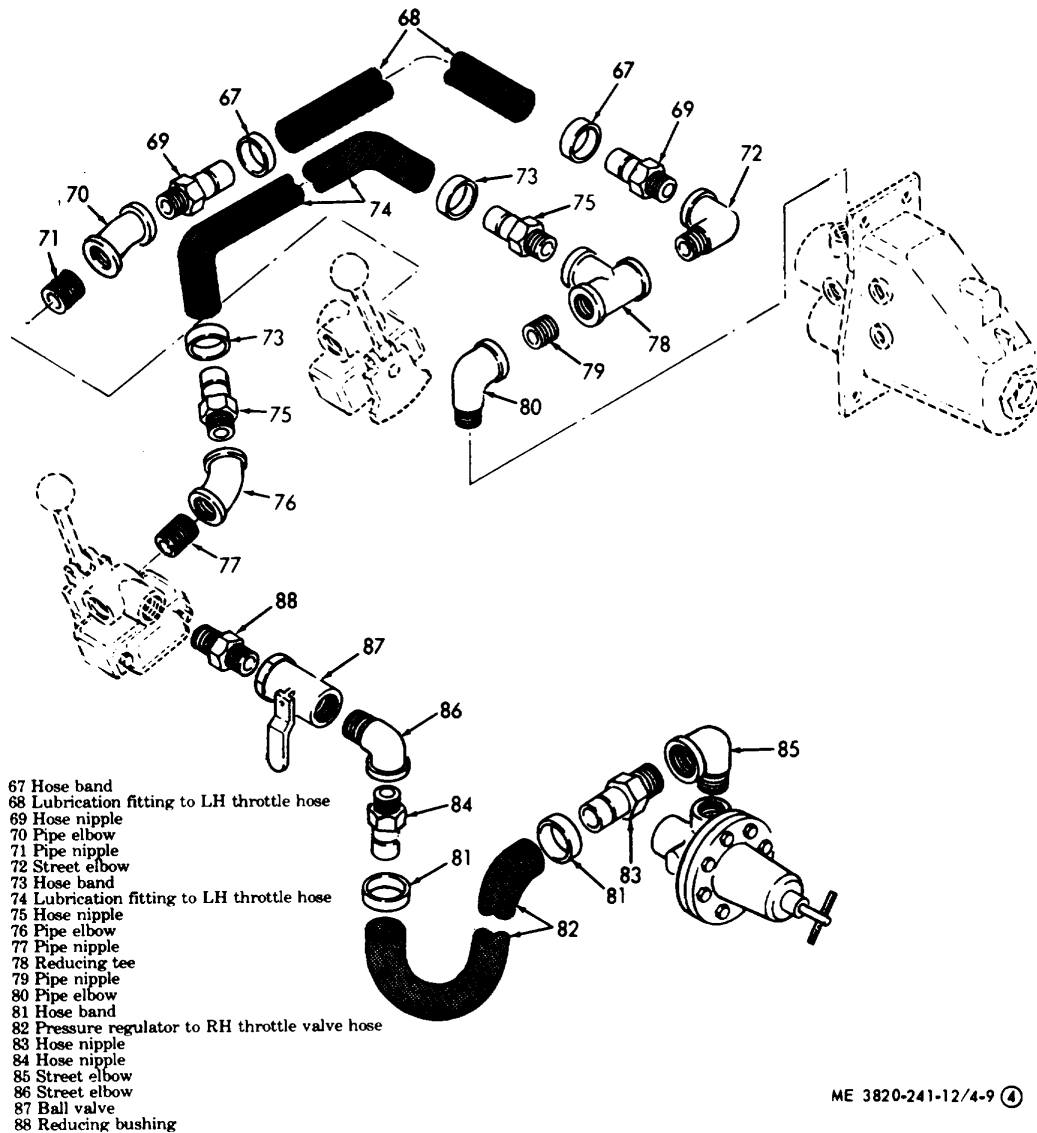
Rock drill pneumatic hoses and fittings, removal and installation (sheet 4 of 4).
